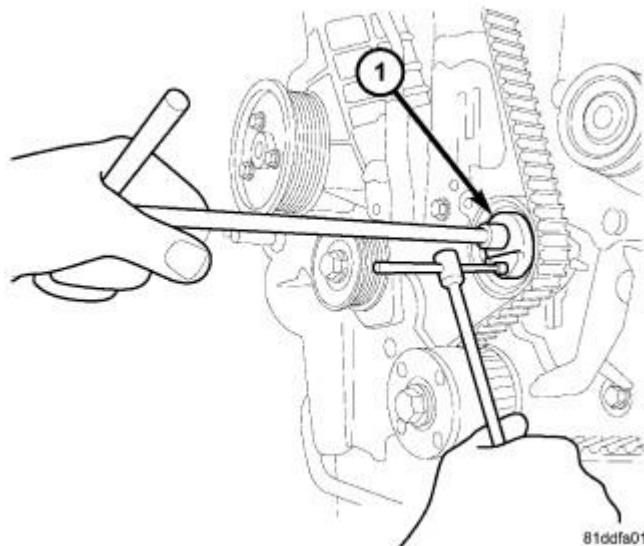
Tighten/Loosen Timing Belt Tensioner Bolt
